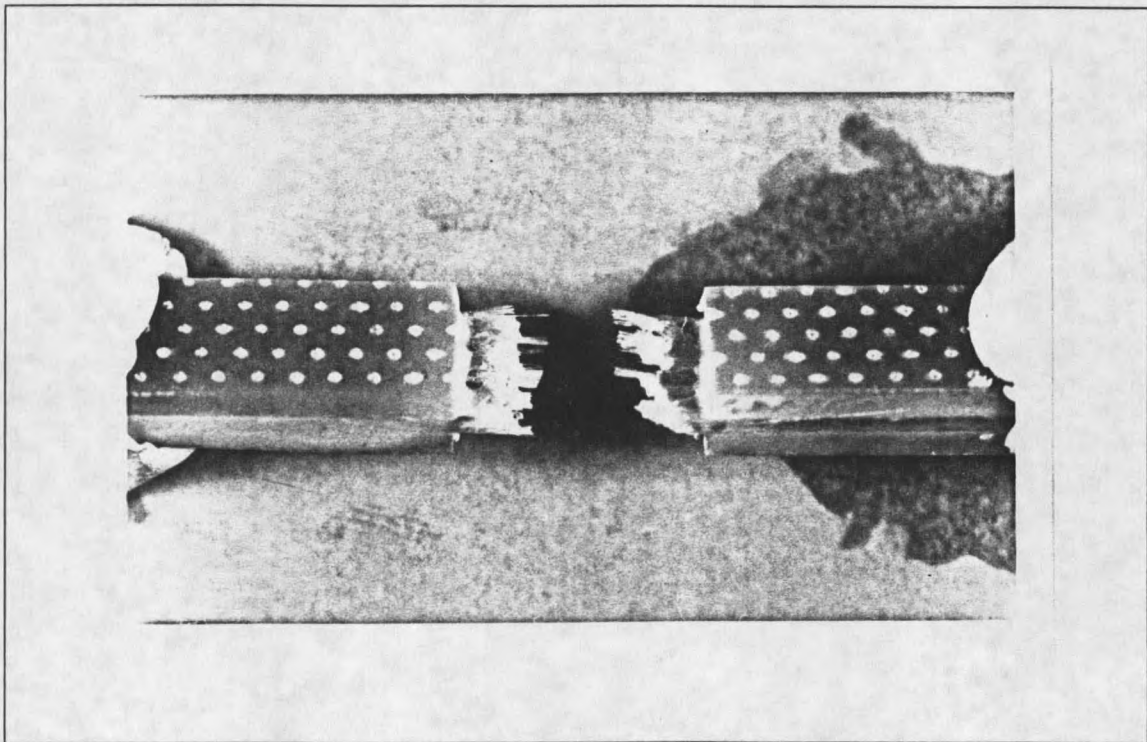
Fatigue Failure of R=10 Compressive Specimen [4].
